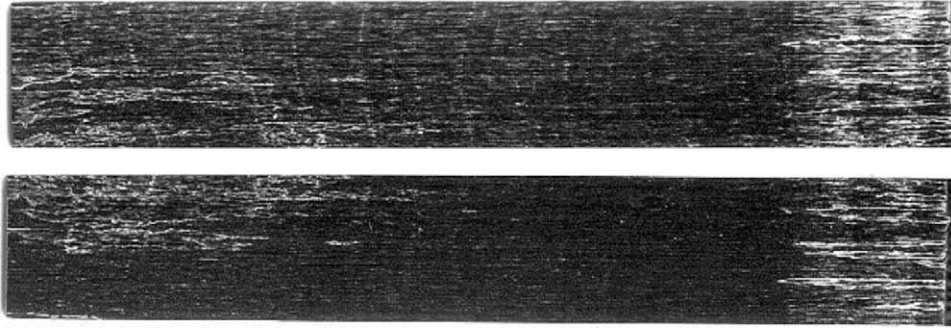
Fracture surfaces of sample tested at 22°C.
